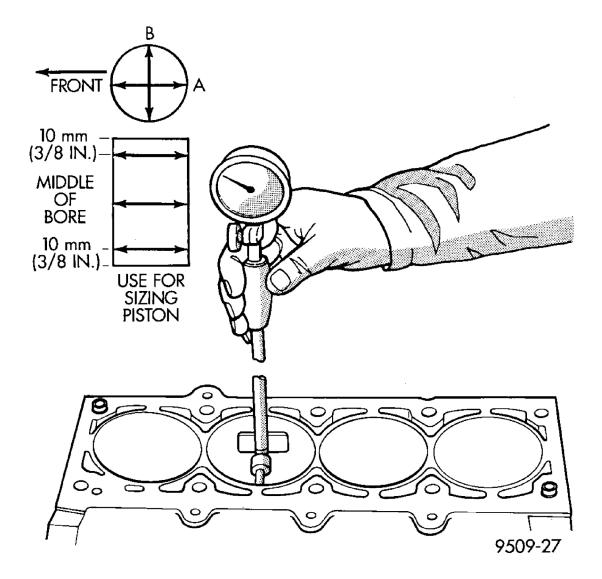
Checking Cylinder Bore Diameter Courtesy of CHRYSLER LLC
